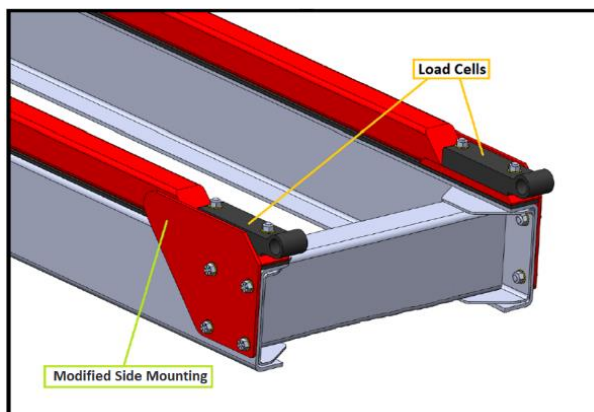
Example of load cells mounted to modified sub frame that maintains structural integrity. In this example, by enlarged and thickened mounting plates with upside down countersunk fasteners to prevent bolting through chassis flange)
